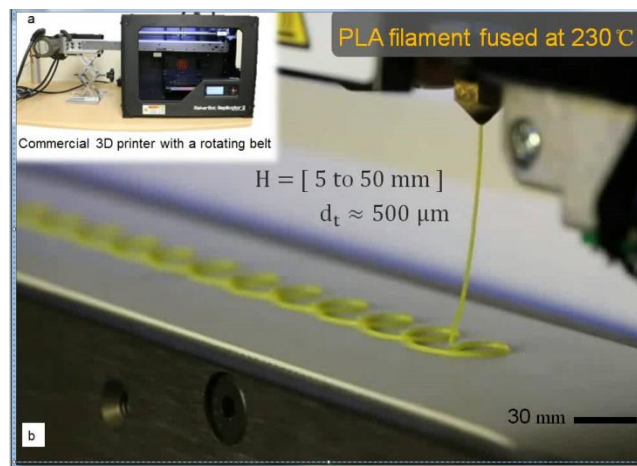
Supplementary Video 1: Video of the IFDM a) SetUp: a rotating belt is incorporated to a commercial 3D printer extruding fused PLA at a regular rate b) close up on the head printer, the filament coils mostly due to axial compressive forces
